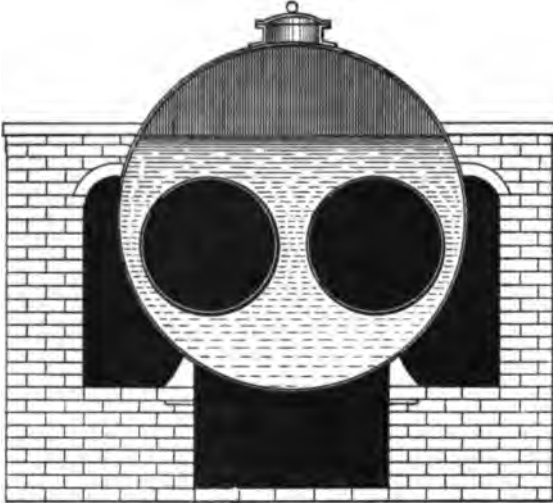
Section of Lancashire boiler and brickwork setting.
